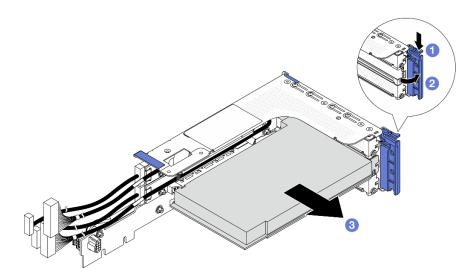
Removing a PCIe adapter from the 3FH riser cage
